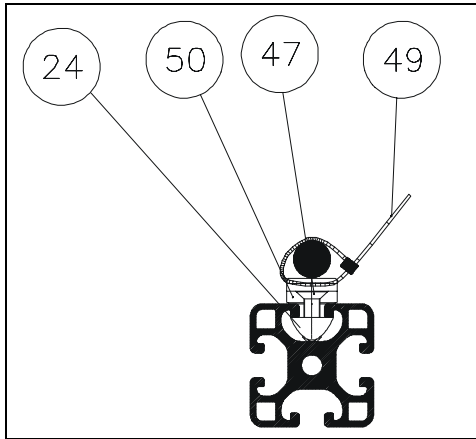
Securing Welding Cable to Side Beam (top view)
